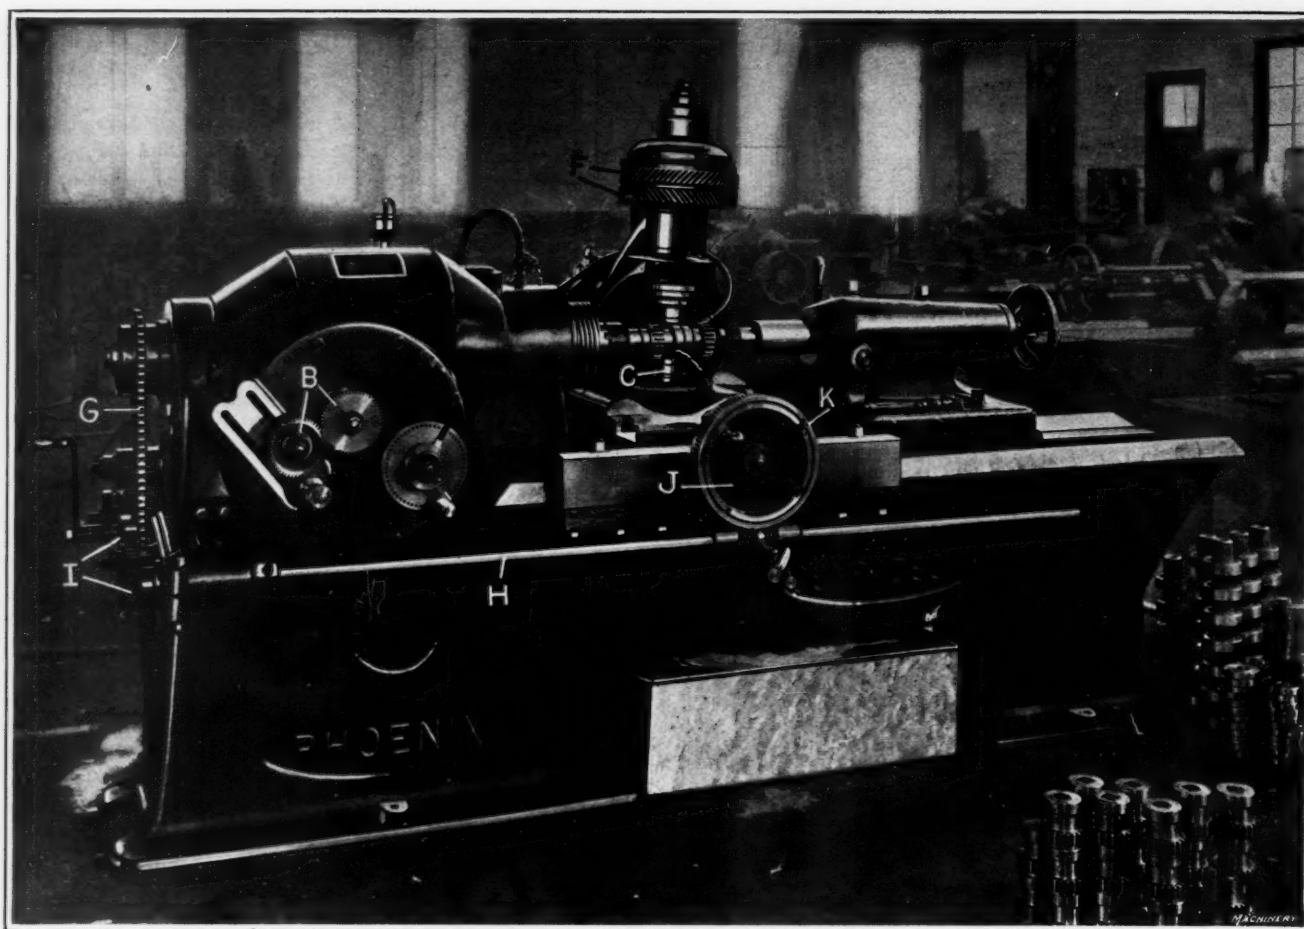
Special Gear-hobber set up for hobbing Small Spur Gears
